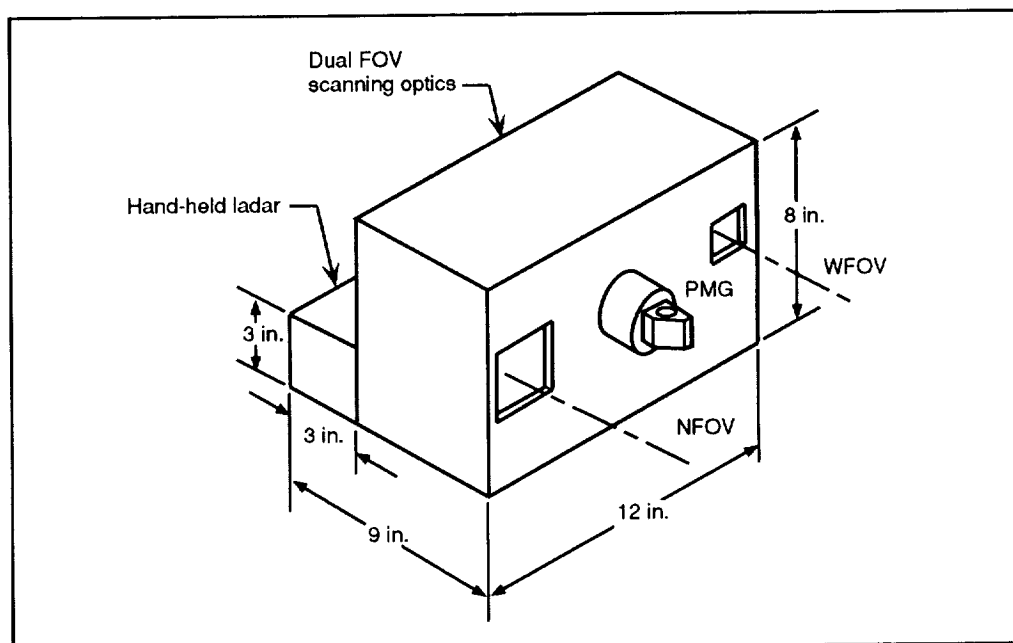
Phase II prototype hand-held ladar/dual FOV scanning package.
